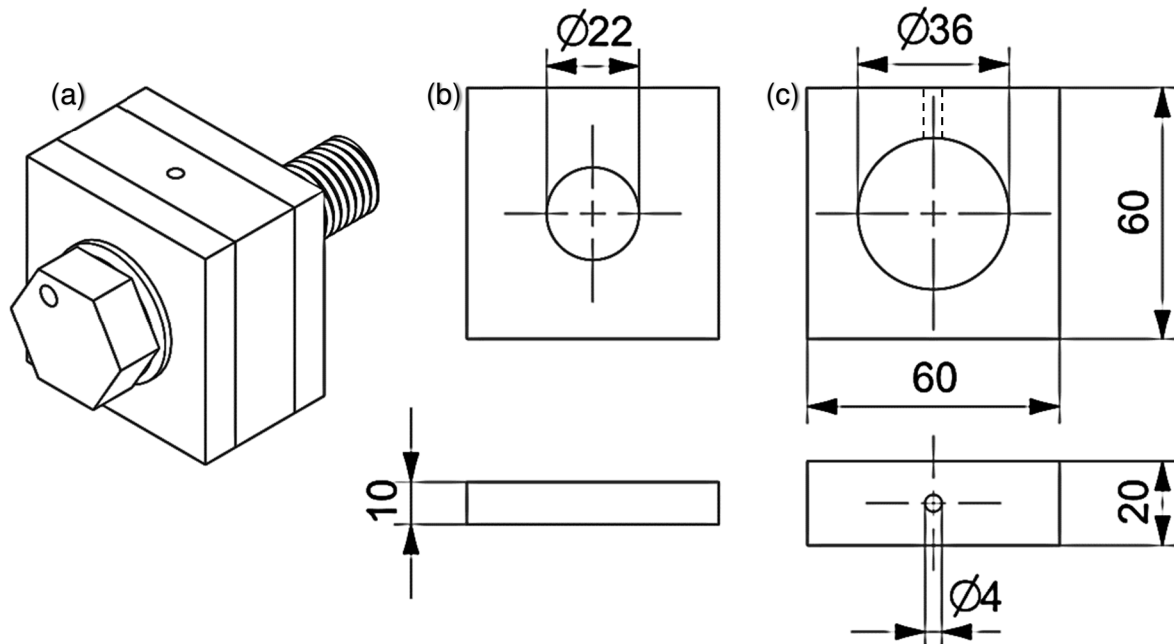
Injectability test set-up, (a) final assembly, (b) cover plate and (c) centre plate with air escape channel. Fastener system cf. Section 3.1.1. All dimensions in mm.
